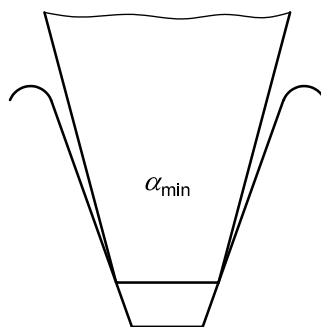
Fitting of limit gauge in the groove to be checked (good)
